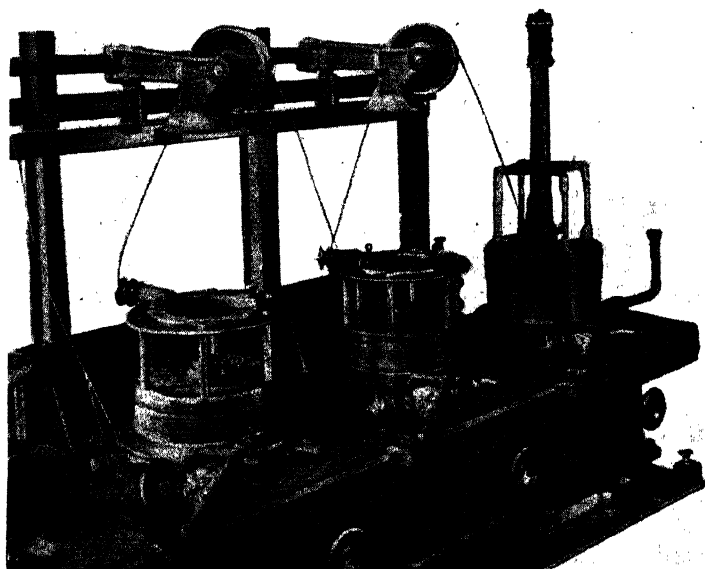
“Close-up” of a Four-Die Machine for Wire Drawing from 5 S.W.G. Hot-Rolled Steel Wire Rod.
